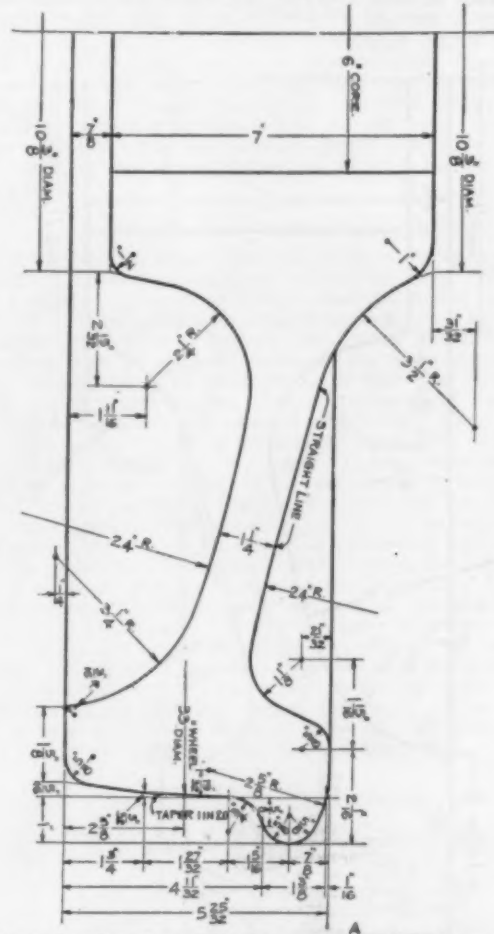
33-in. Cast-iron Wheel for Cars of Maximum Gross Weight Not To Exceed 136,000 lb.—700-lb. Wheel for 5-in. by 9-in. Axle
